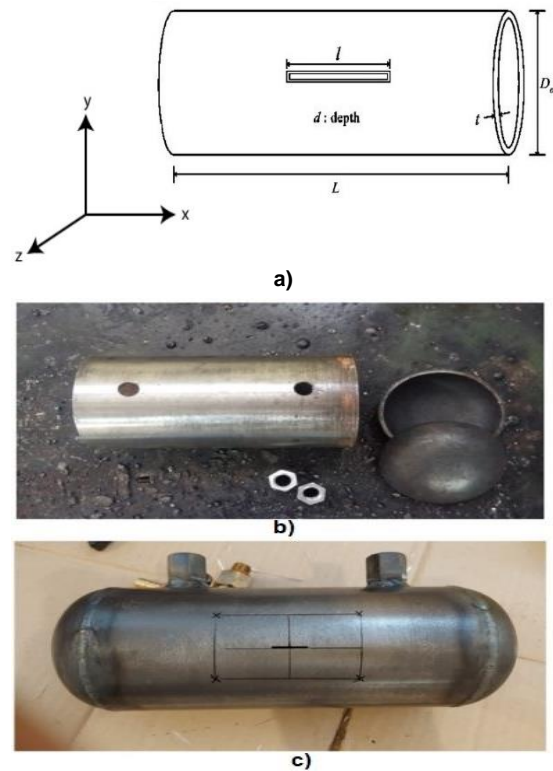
Schematic of a) cracked steel pipe, b) steel pipe before, and c) after assembly
